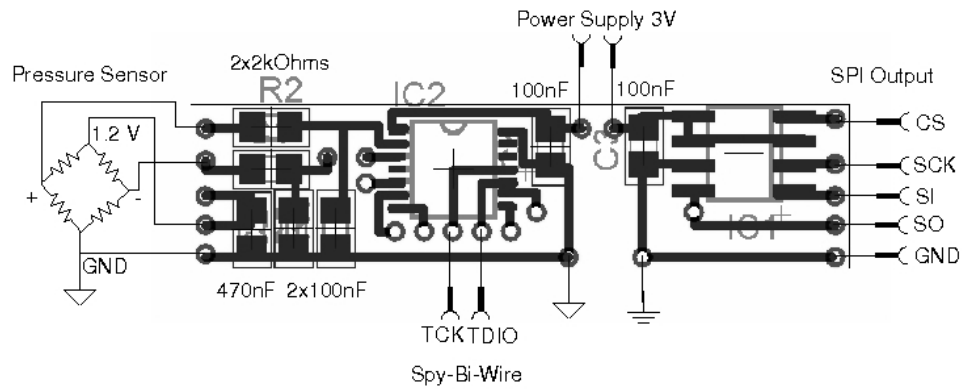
PCB frontside layout with connected components. The layout is not yet optimized for size, and an optimized design is expected to fit in a packaging of the size of existing DSTs.
